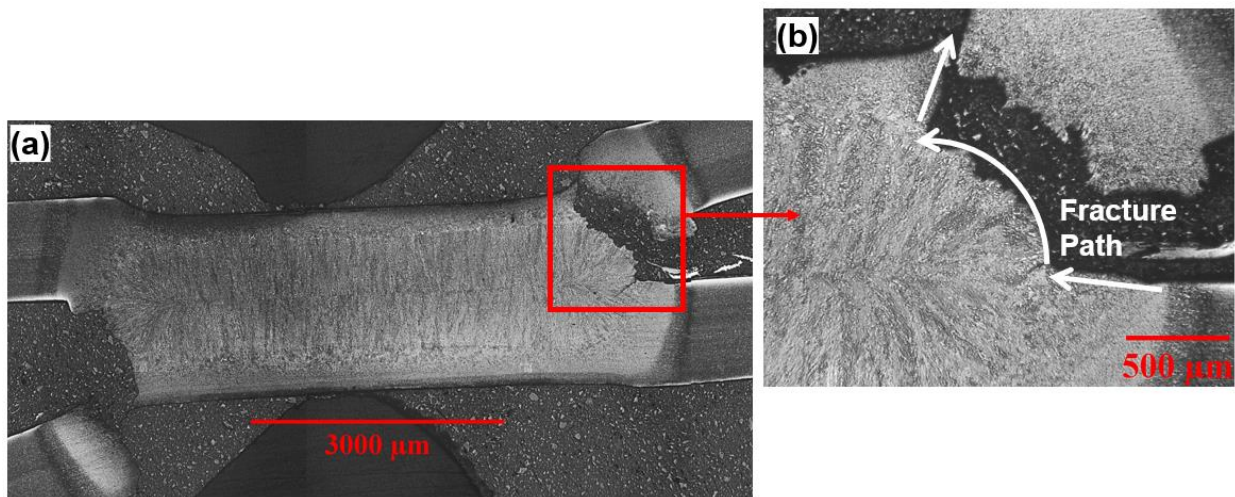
Cross-section of the Q&P980 weld nugget after interrupted CTS test. (a) Image of the cross-section showing the fracture path, (b) High magnification image of the fracture path.
